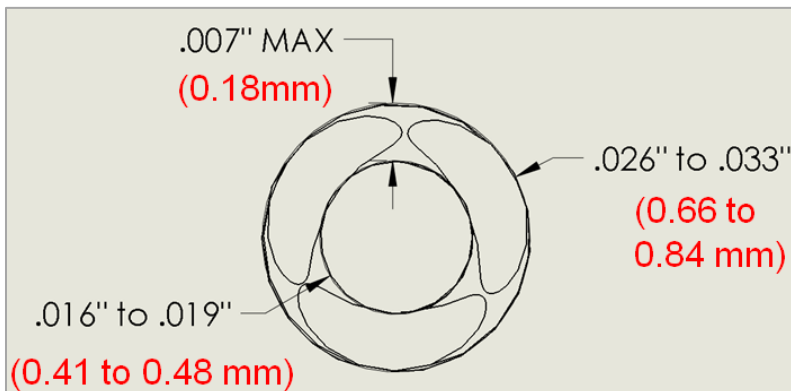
Axial view of a current driveshaft depicting the outer diameter, inner diameter, and wall thickness. A three-wire configuration of the current driveshaft is shown.
